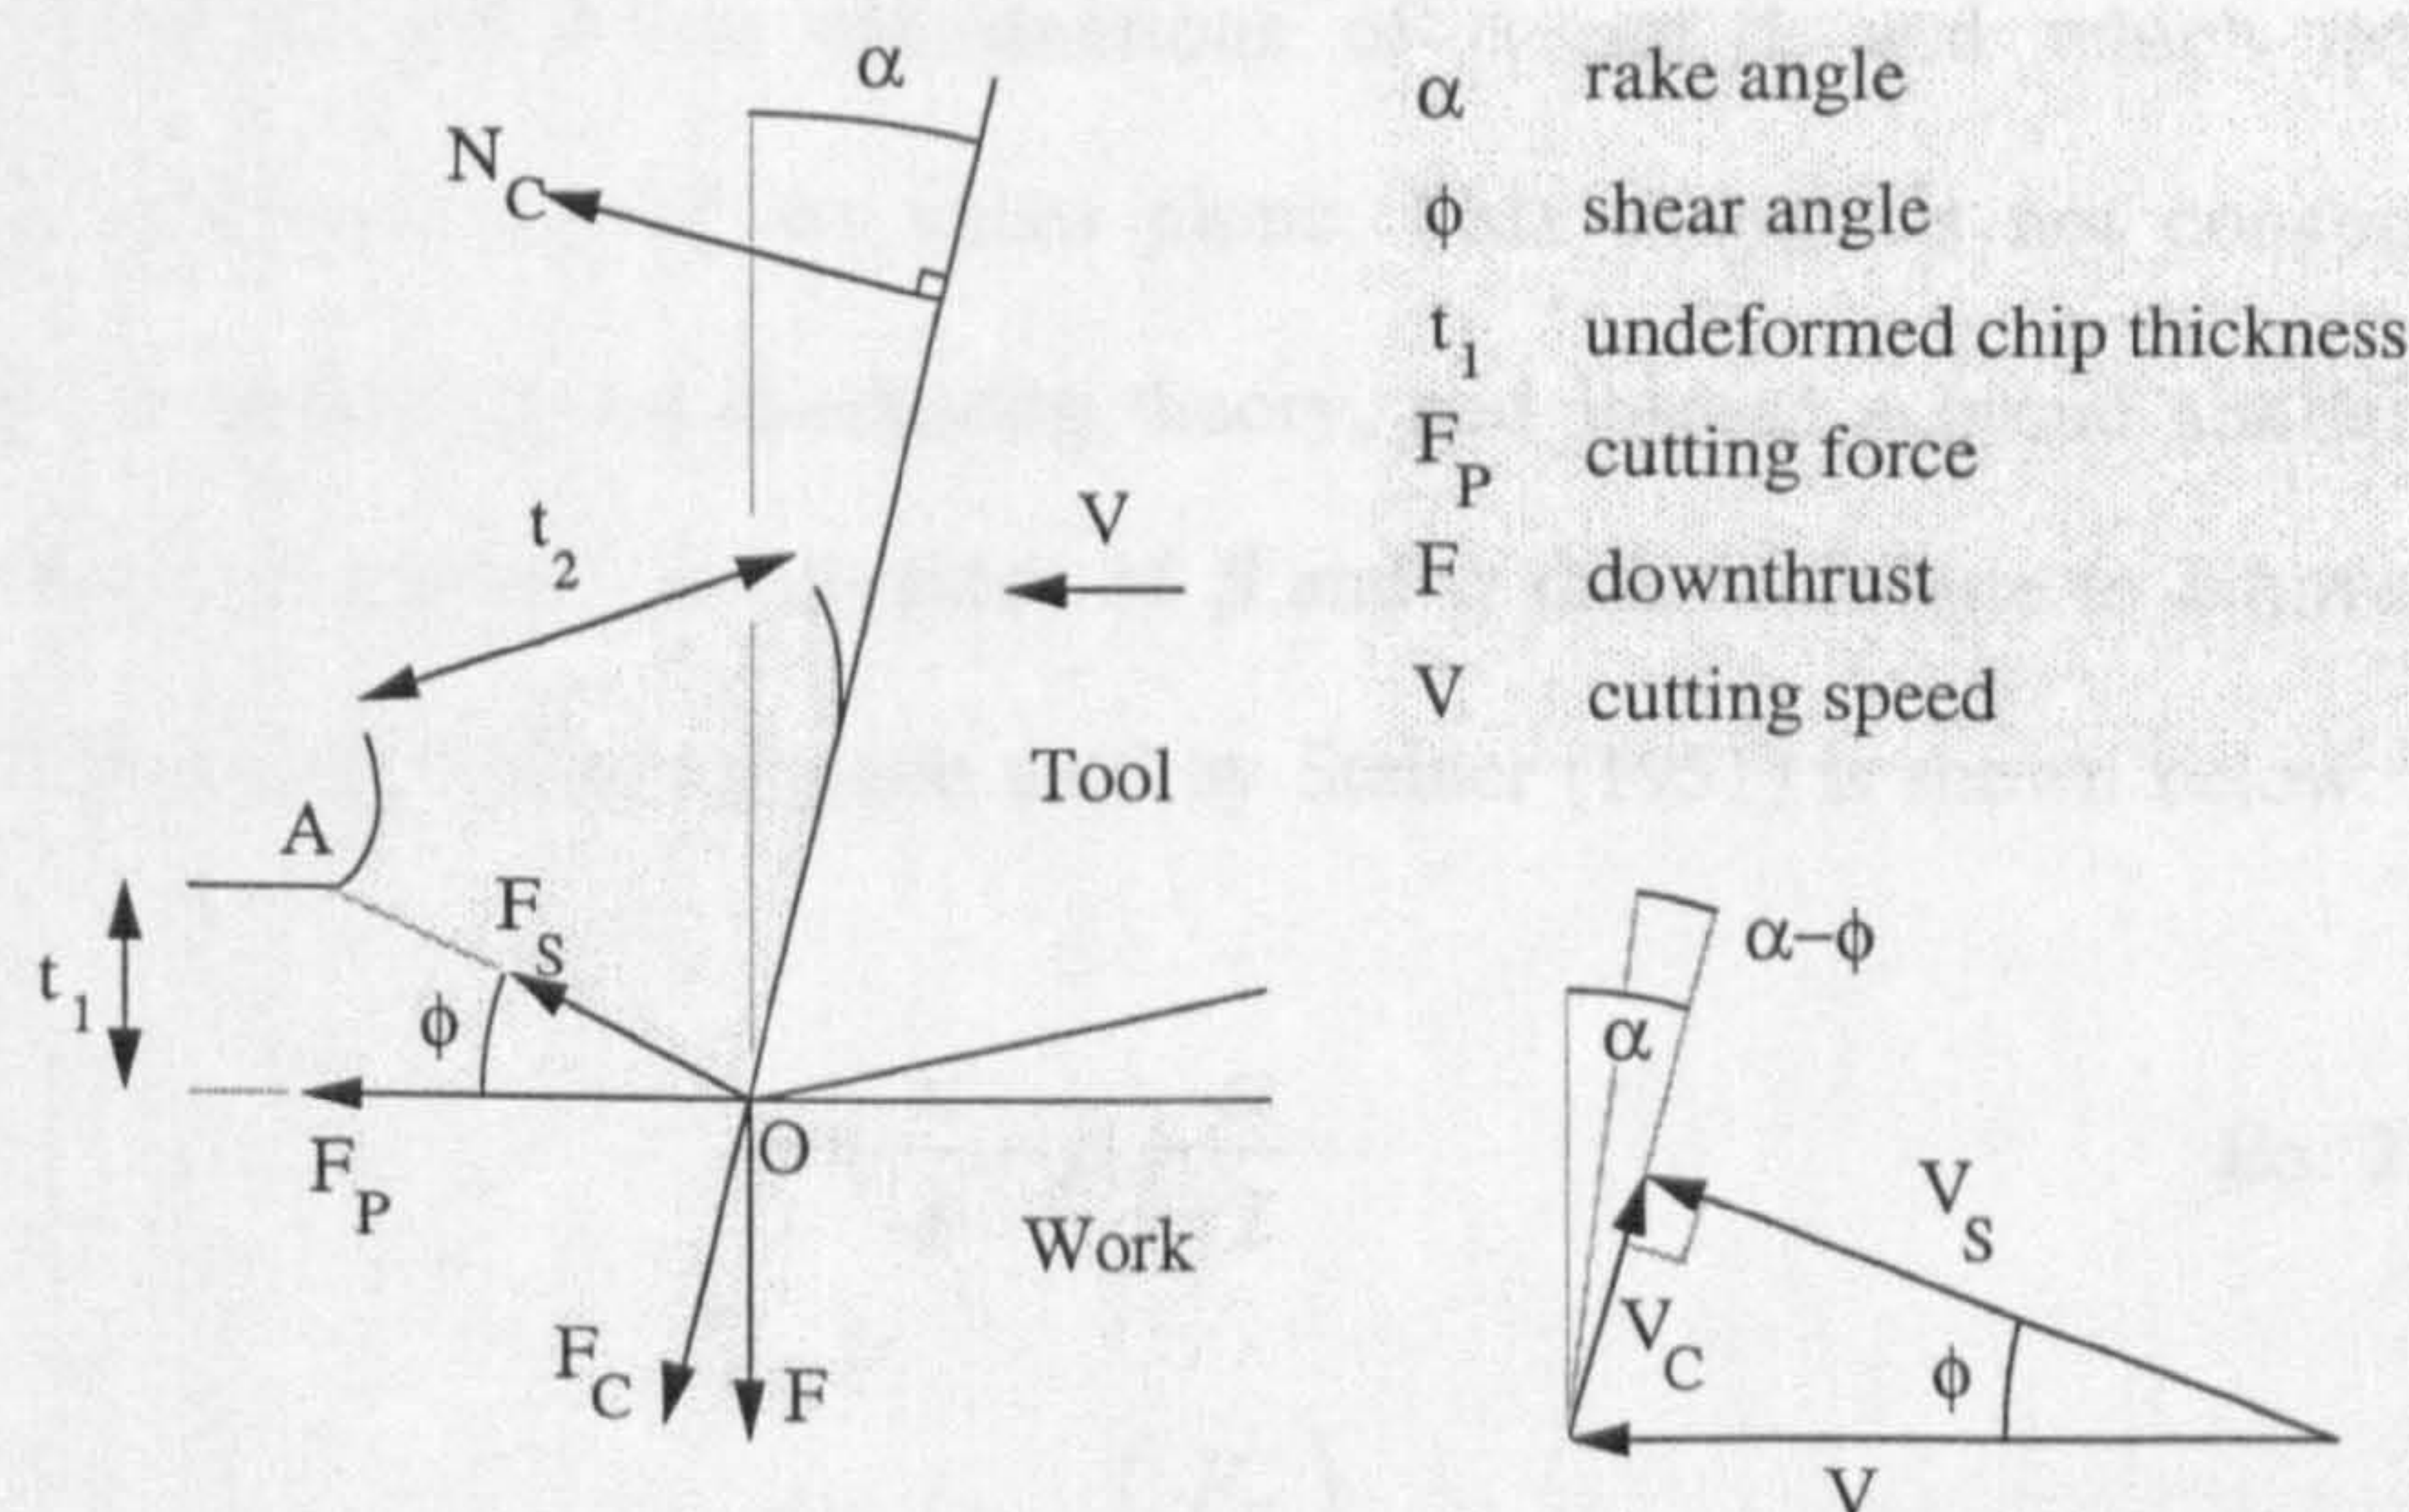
Illustrating the general arrangement of an edged tool and a worked material.
